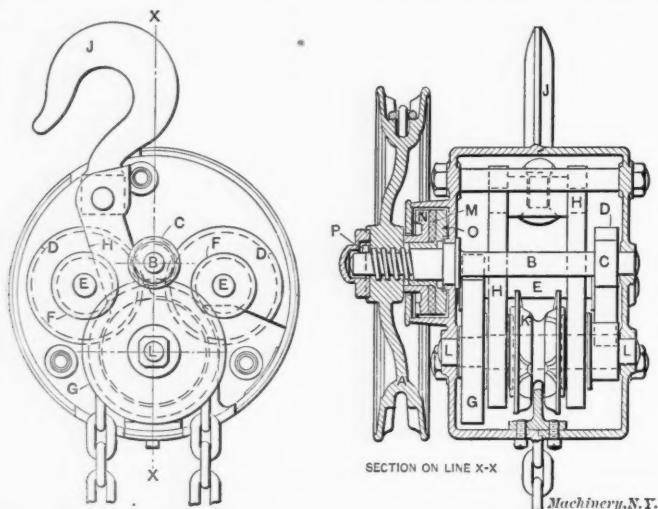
Mechanism of the Imperial Hoist, showing Improved Brake and Suspension
